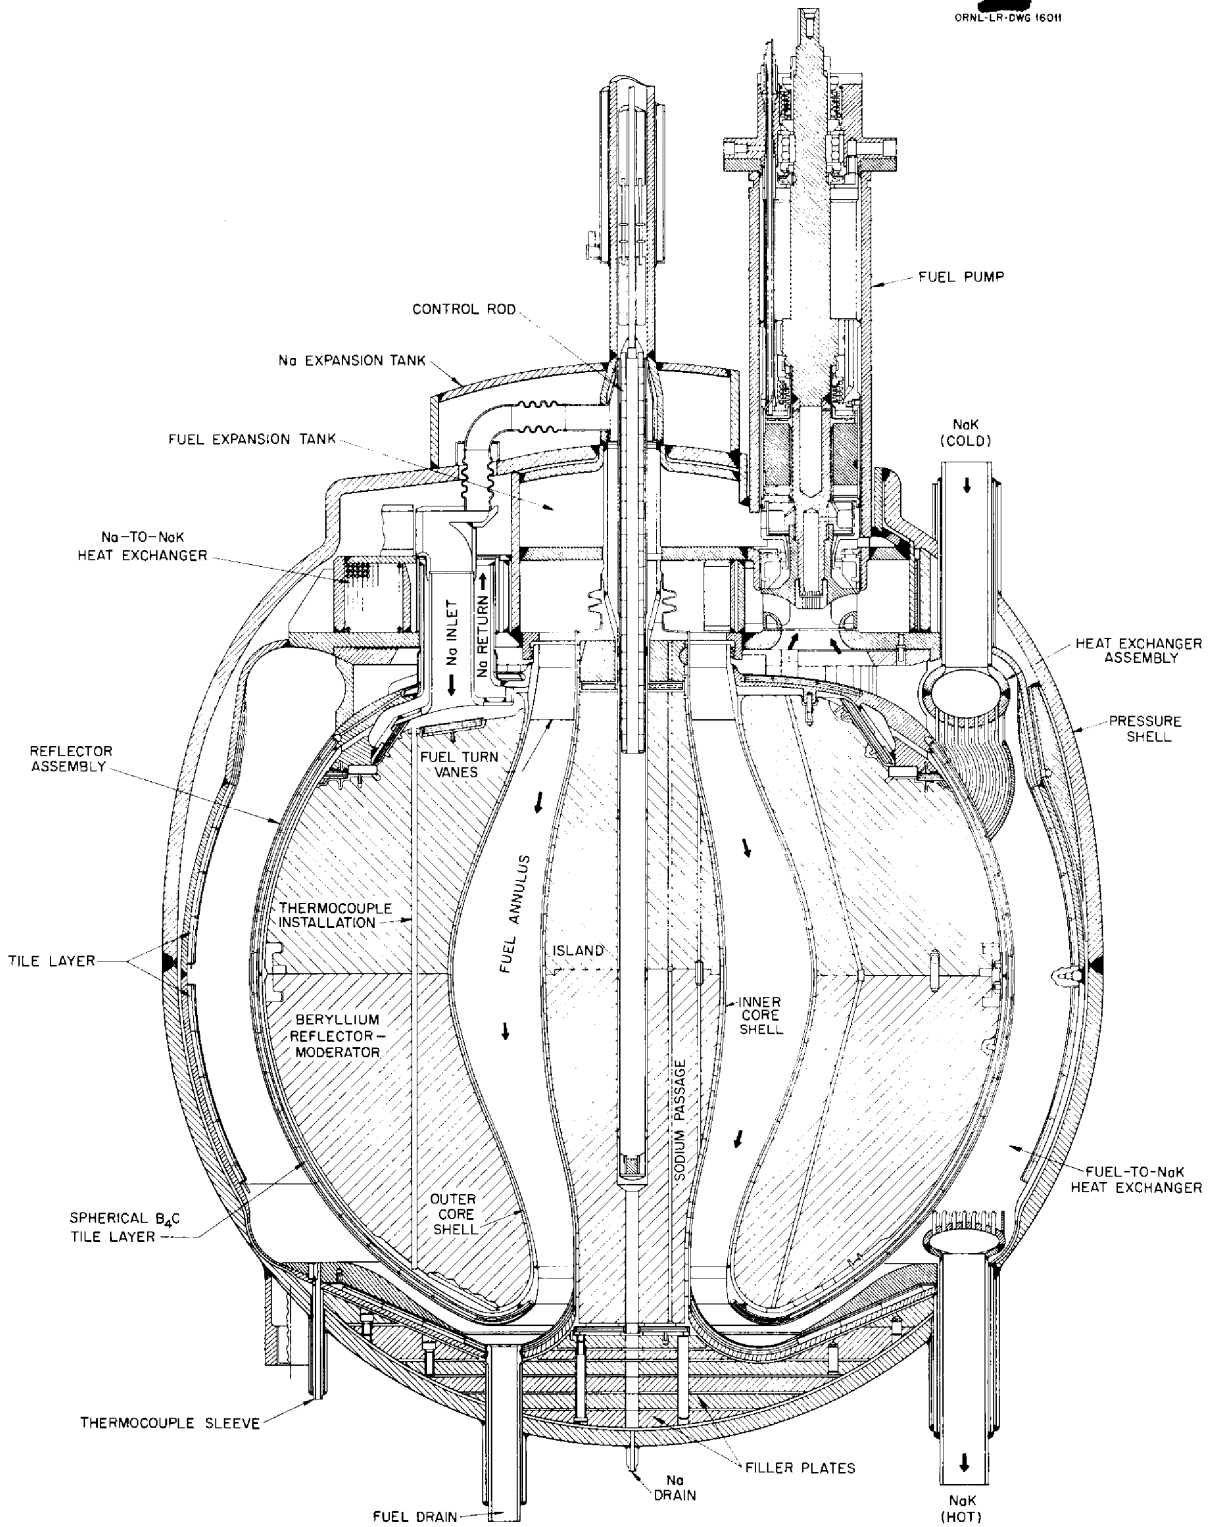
Vertical Section Through Reactor Assembly.
